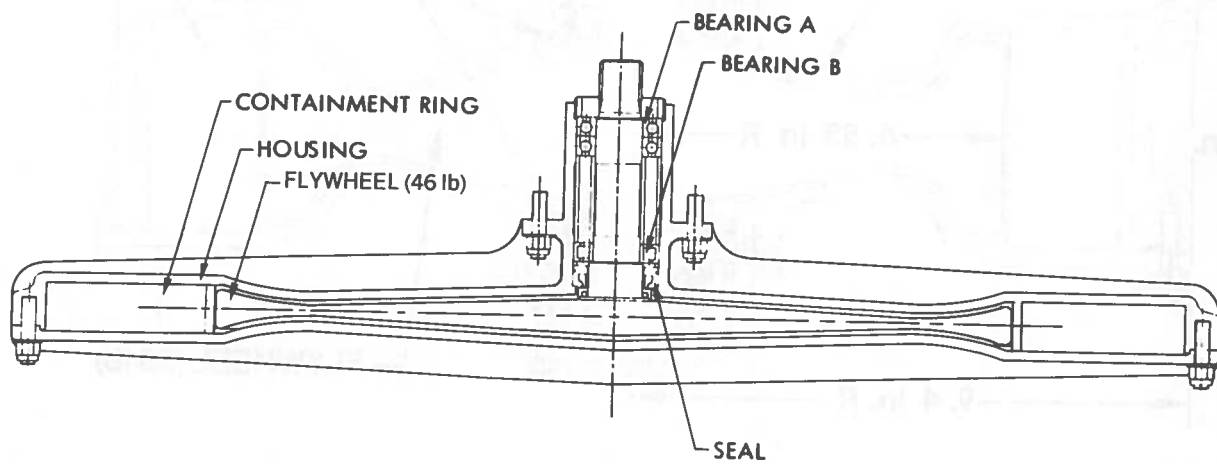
PRELIMINARY LOCKHEED FLYWHEEL DESIGN AND TEST CONFIGURATION FAMILY CAR (Ref. 3-12)
